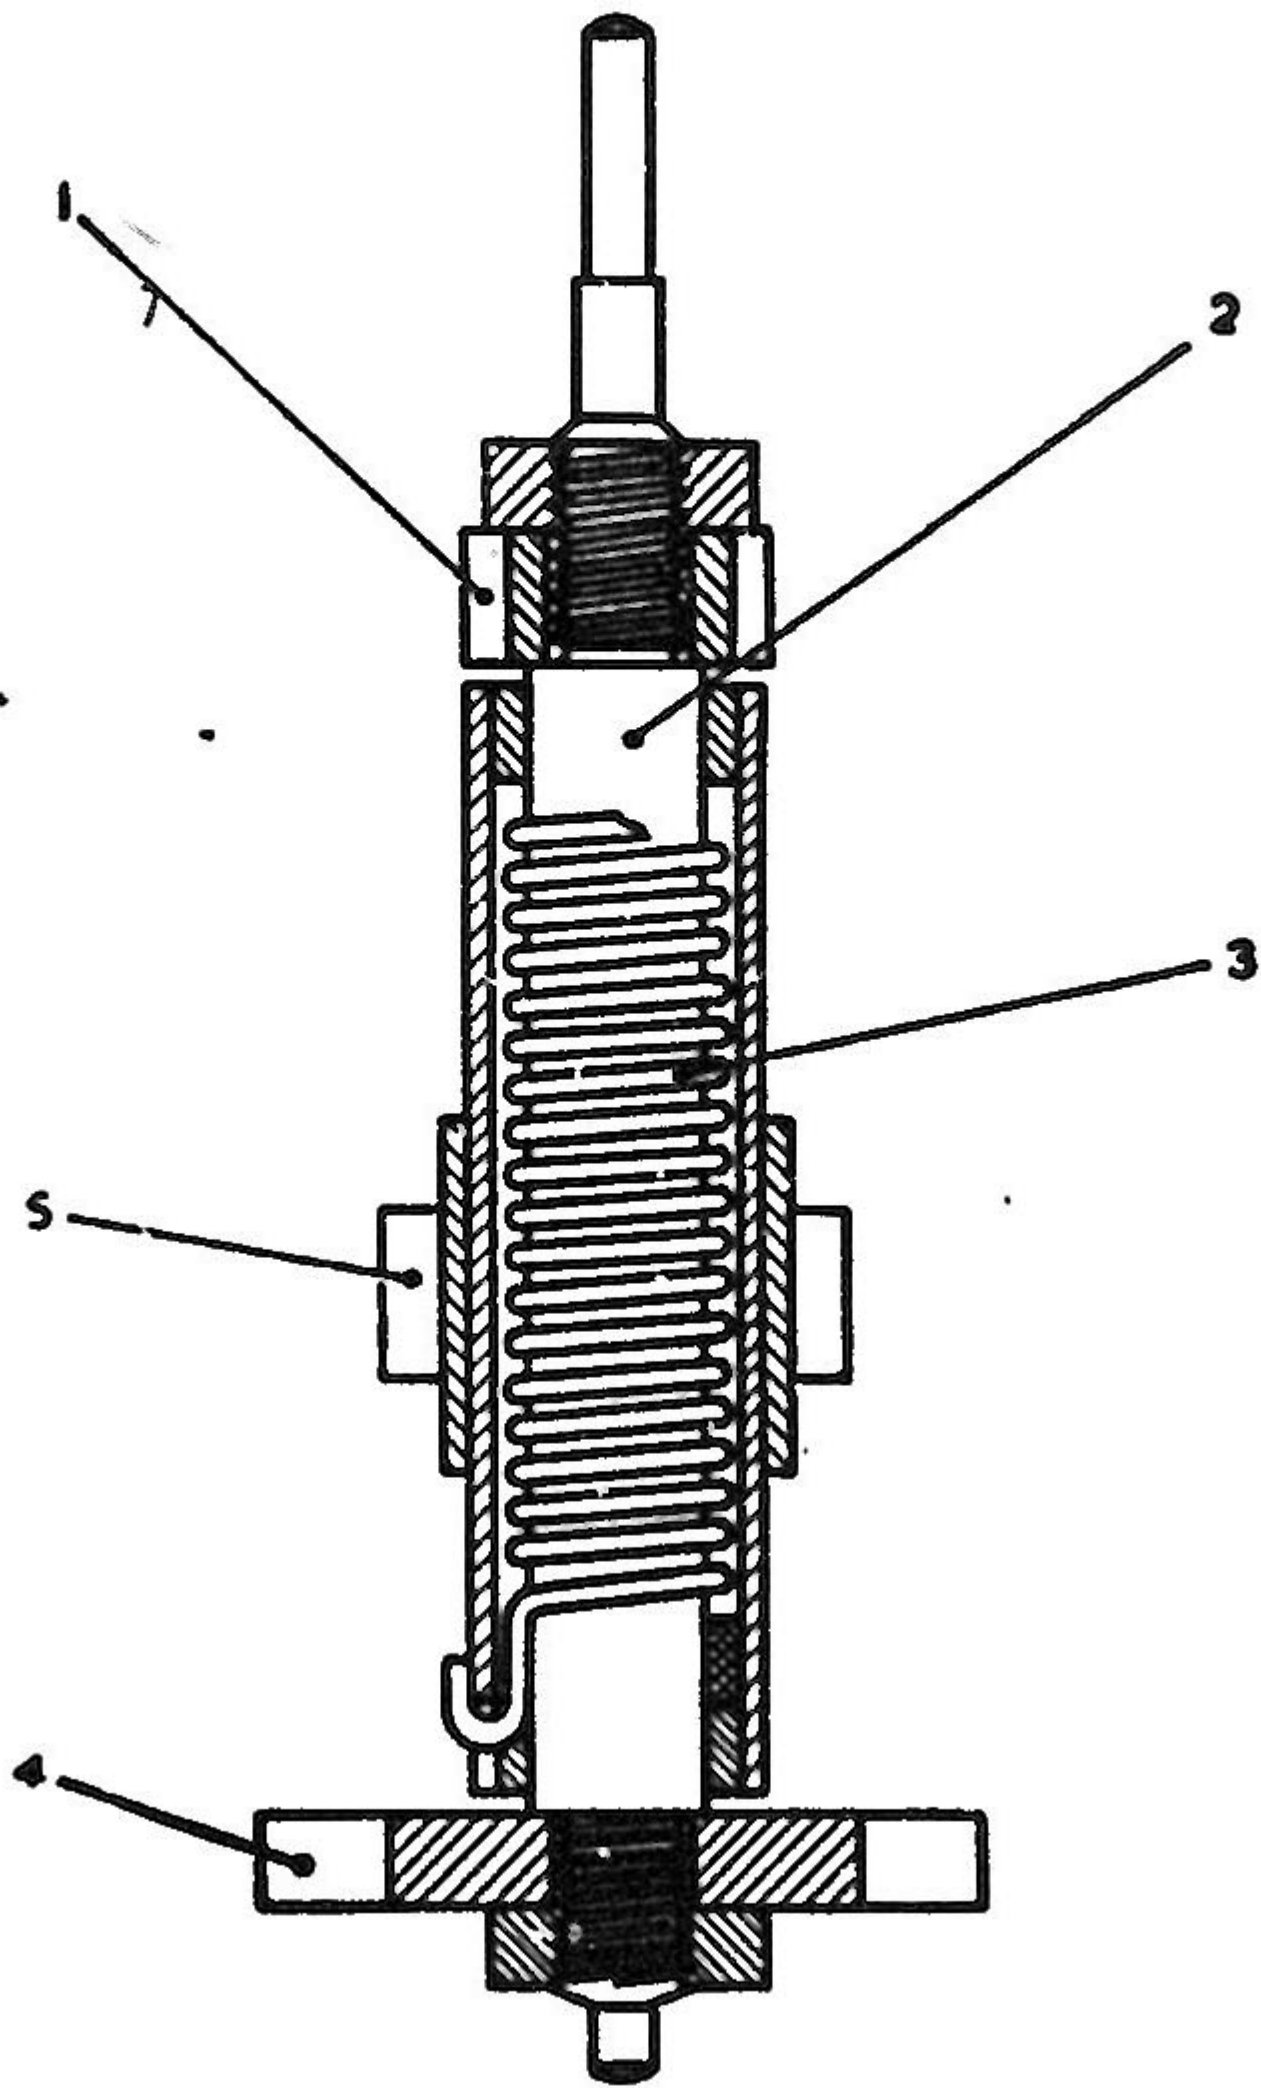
Camera control, Type 35, cut-away view showing arrangement of mechanism
